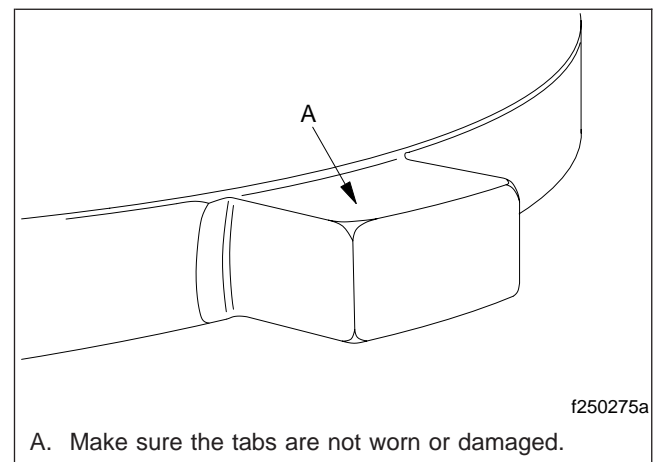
, Inspecting the Tabs on 15-1/2 Inch Clutches
